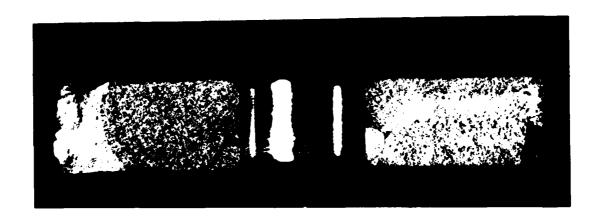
FAILURE SURFACE OF SPECIMEN 1F10
